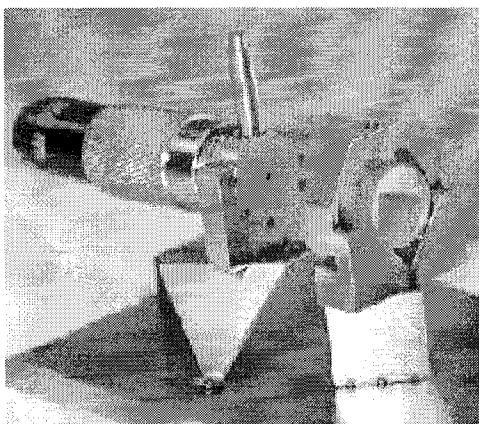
An optical fiber and collimating lens in mounts positioned and then fixed using a laser welder.
